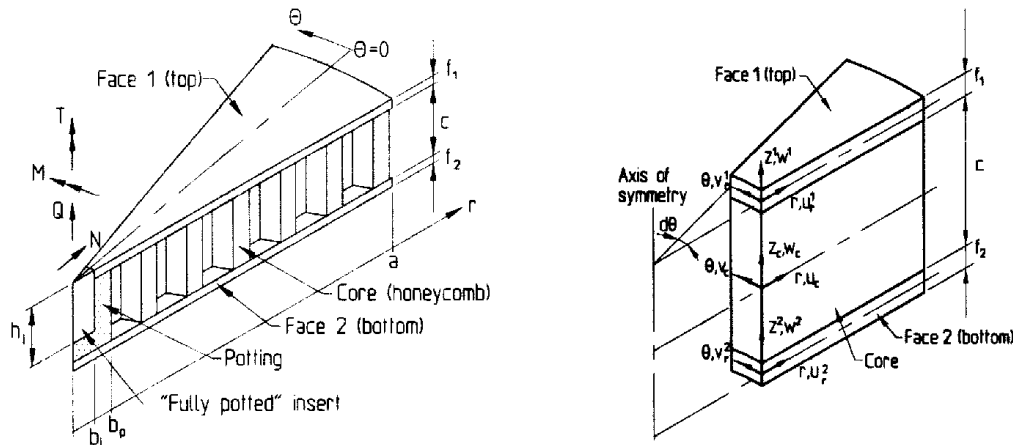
Cut-out of sandwich plate with “fully potted” insert subjected to general loading conditions. Geometrical definition of sandwich plate element.
